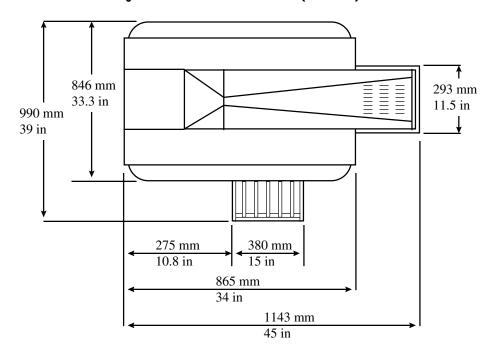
SOLO™ Plus Dimensions (Top View)
